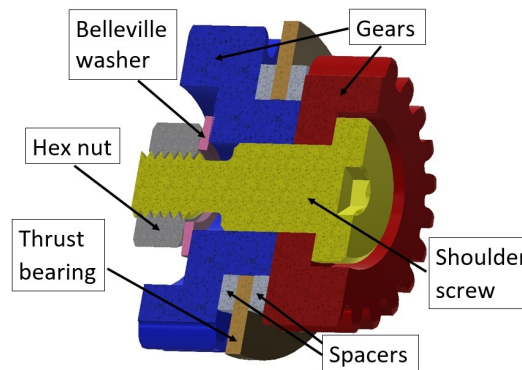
Assembled bearingless planetary gearbox planet design.
